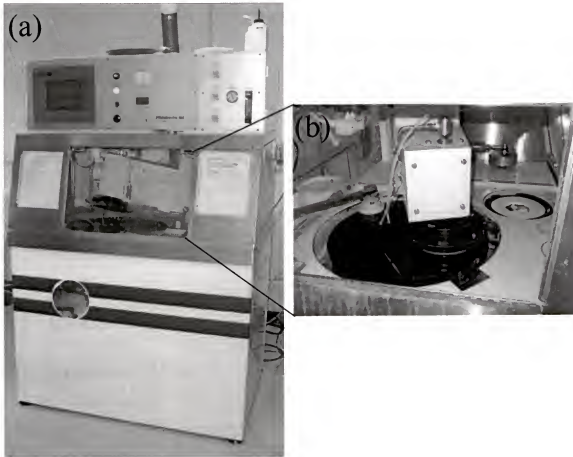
The images of chemical mechanical polishing tool: (a) the Strasbaugh 6EC chemical mechanical polishing tool, (b) a closed-up of the tool [Str03].
